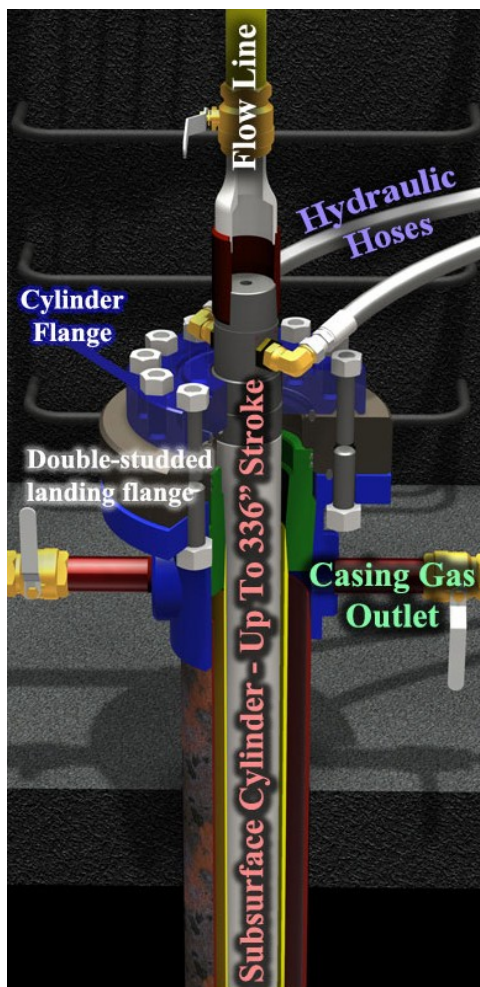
Wellhead Configuration for the Subsurface Hydraulic Cylinder [31]
